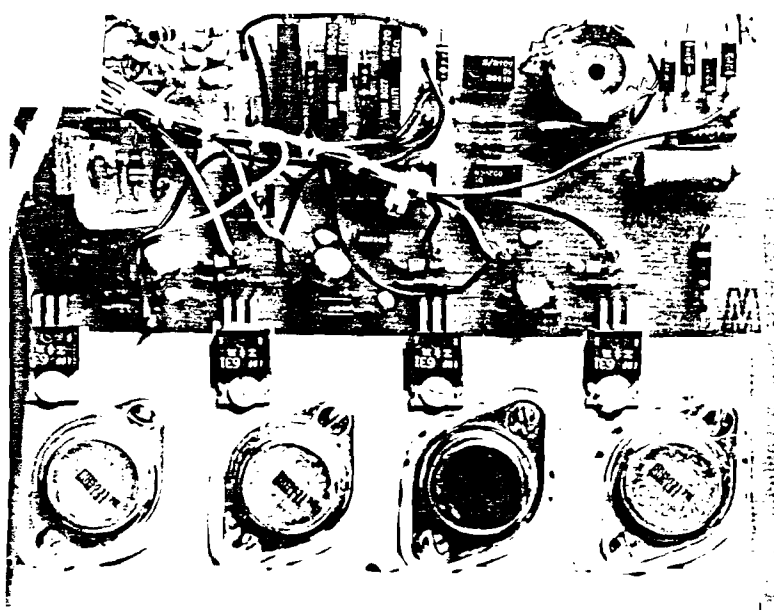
Front View of Regulator/Chopper Circuit Card.(K)
